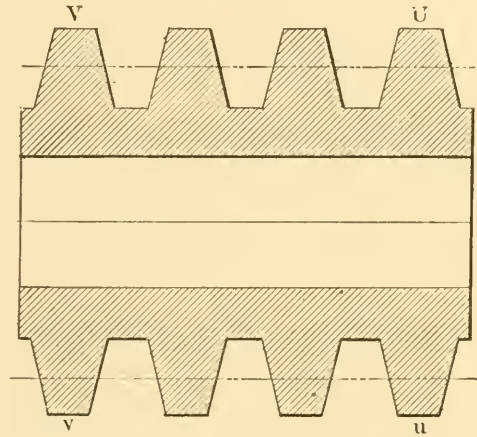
A DOUBLE-THREAD HOB WITH TWO ROWS OF CUTTING EDGES.
